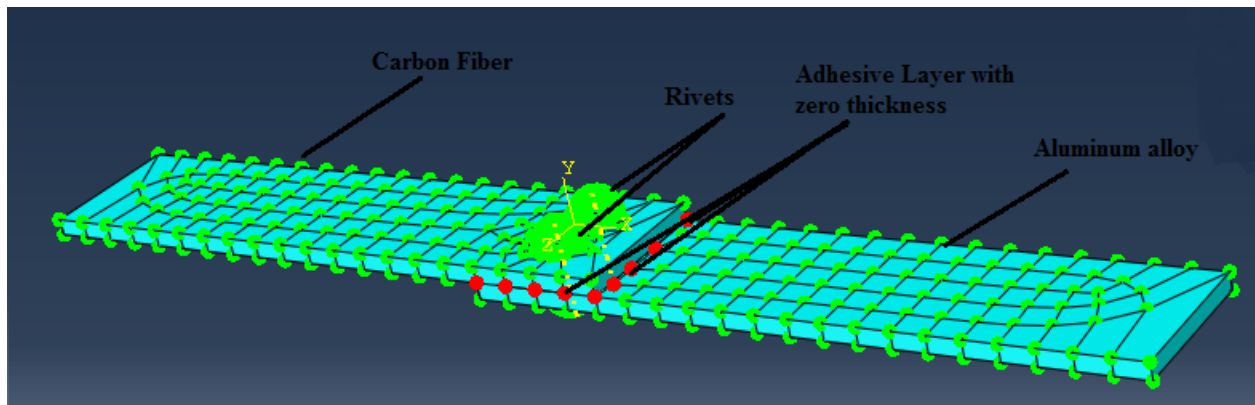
Meshed assembly of hybrid joint with zero thickness of adhesive
